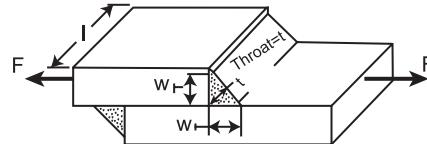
A double-fillet lap-weld joint.
